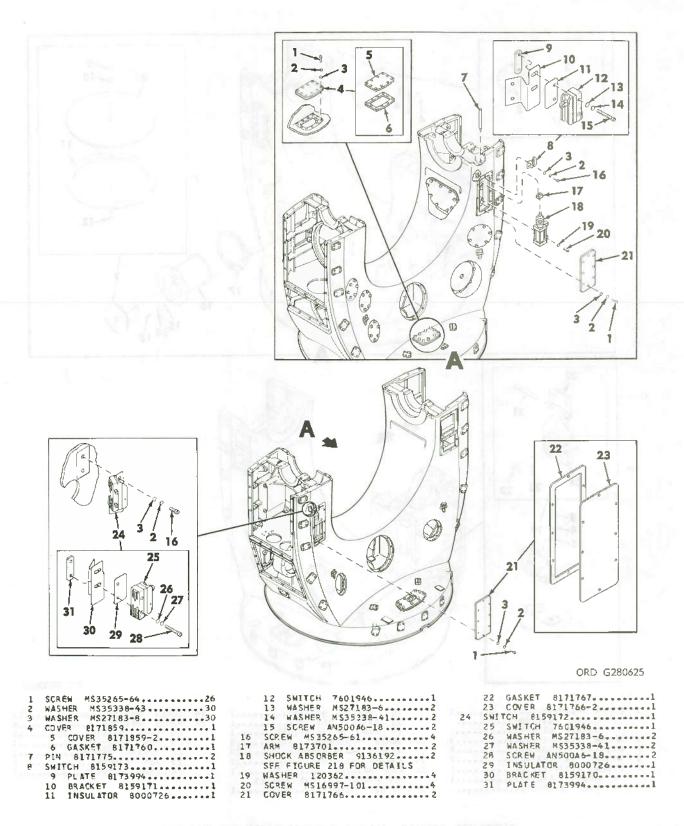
PEDESTAL, ANTENNA /8171625/-PARTIAL EXPLODED VIEW
